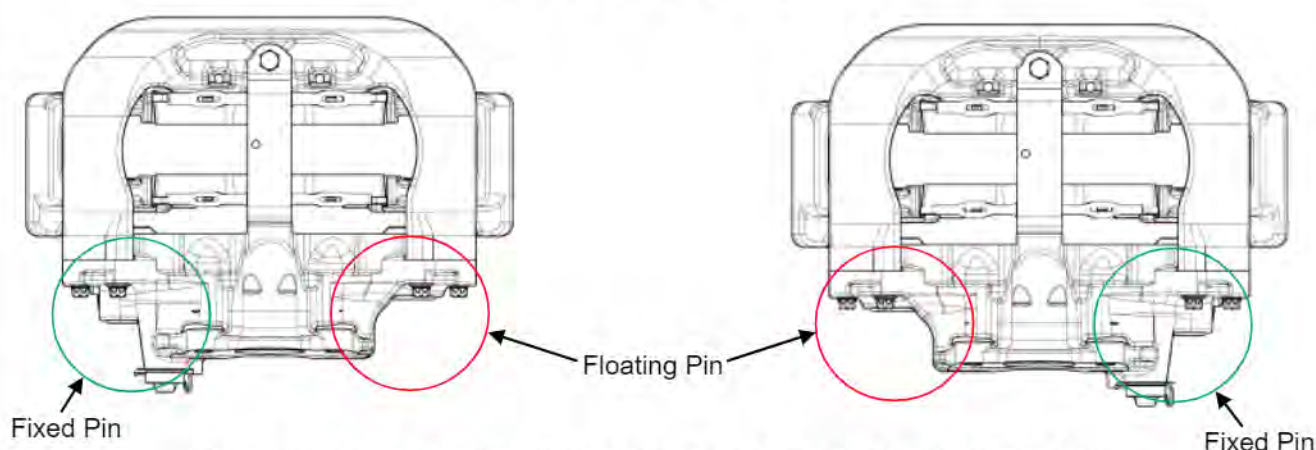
Type 1 Meritor Brake Caliper and a Type 2 Meritor Brake Caliper
